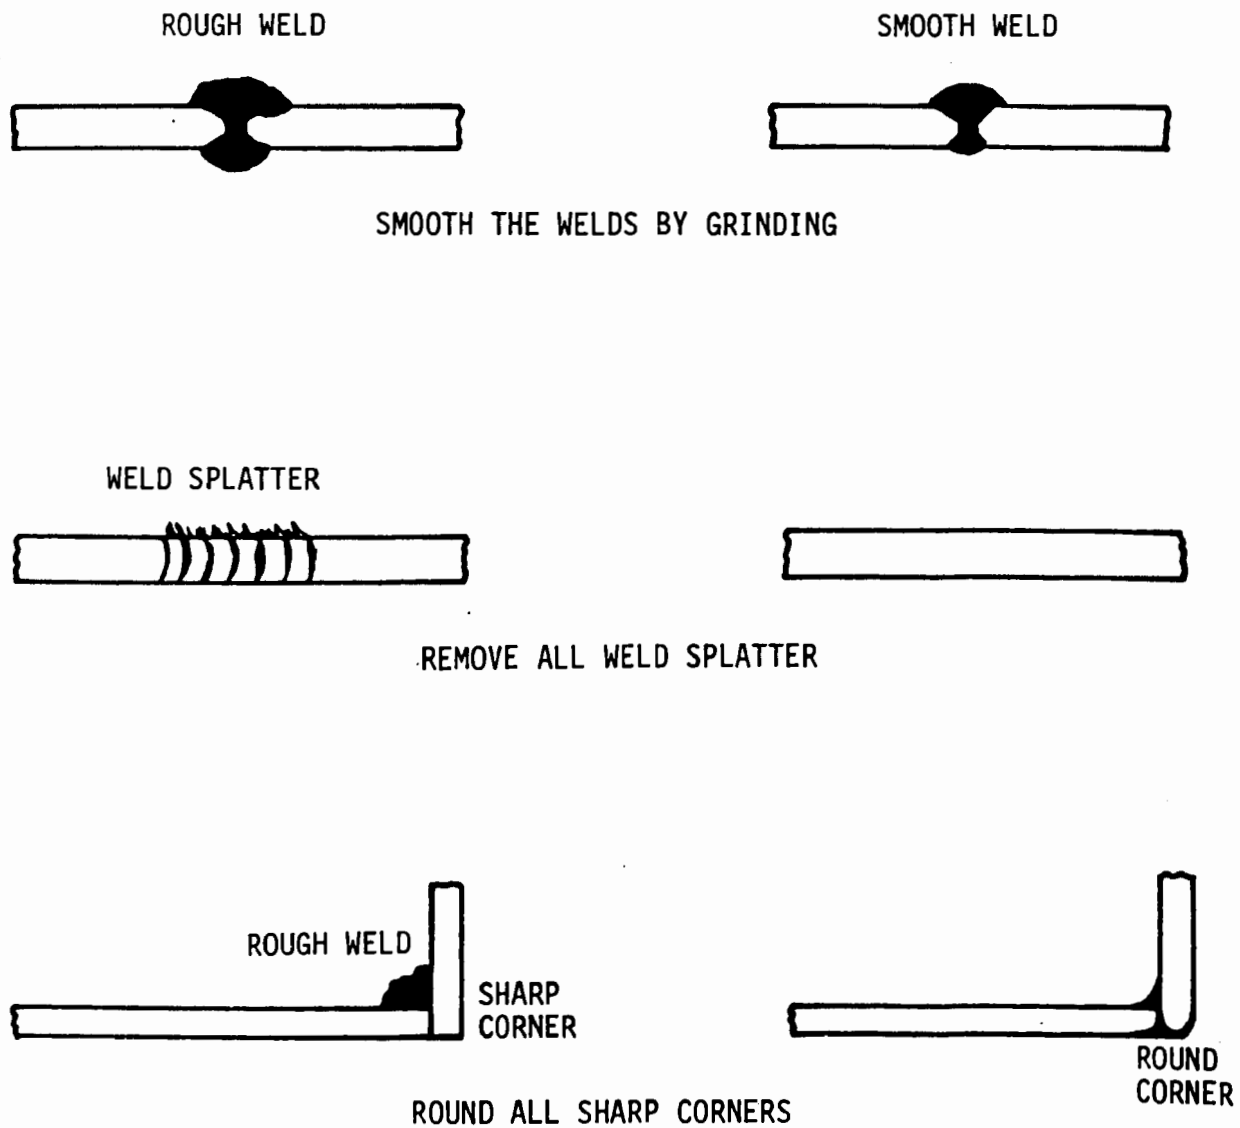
Examples of good and bad finishing techniques for welds.
